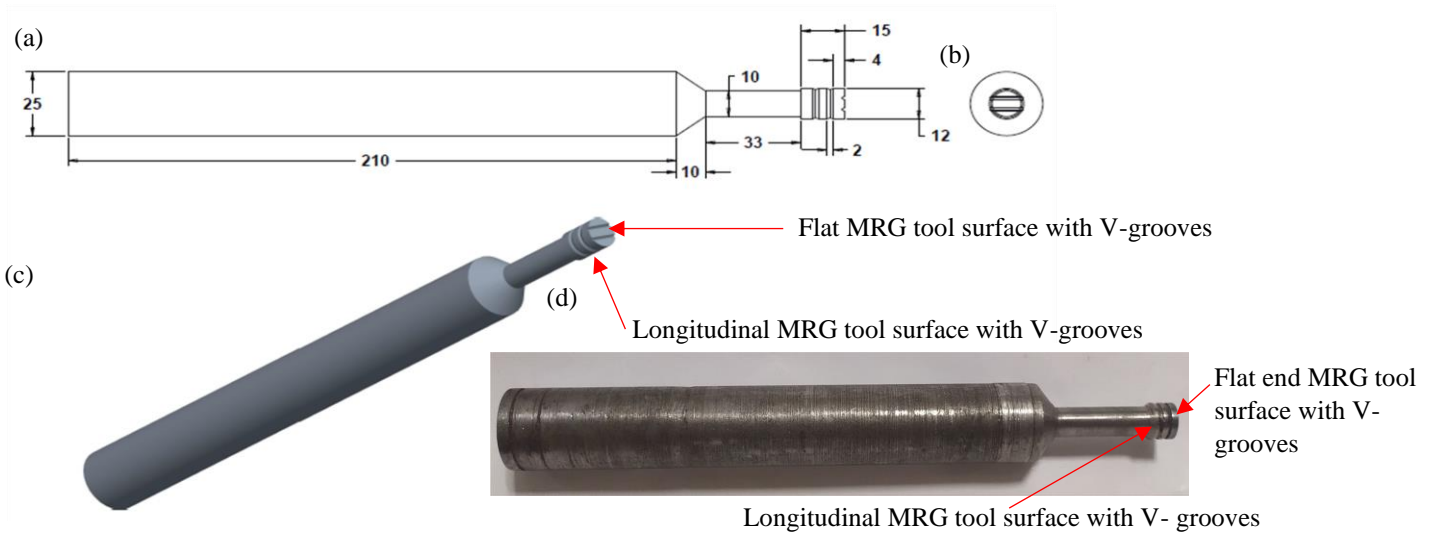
2D drawing of the (a) projected front view, (b) projected side view, (c) 3D CAD model, and (d) fabricated magnetorheological grinding tool with V-grooves.
